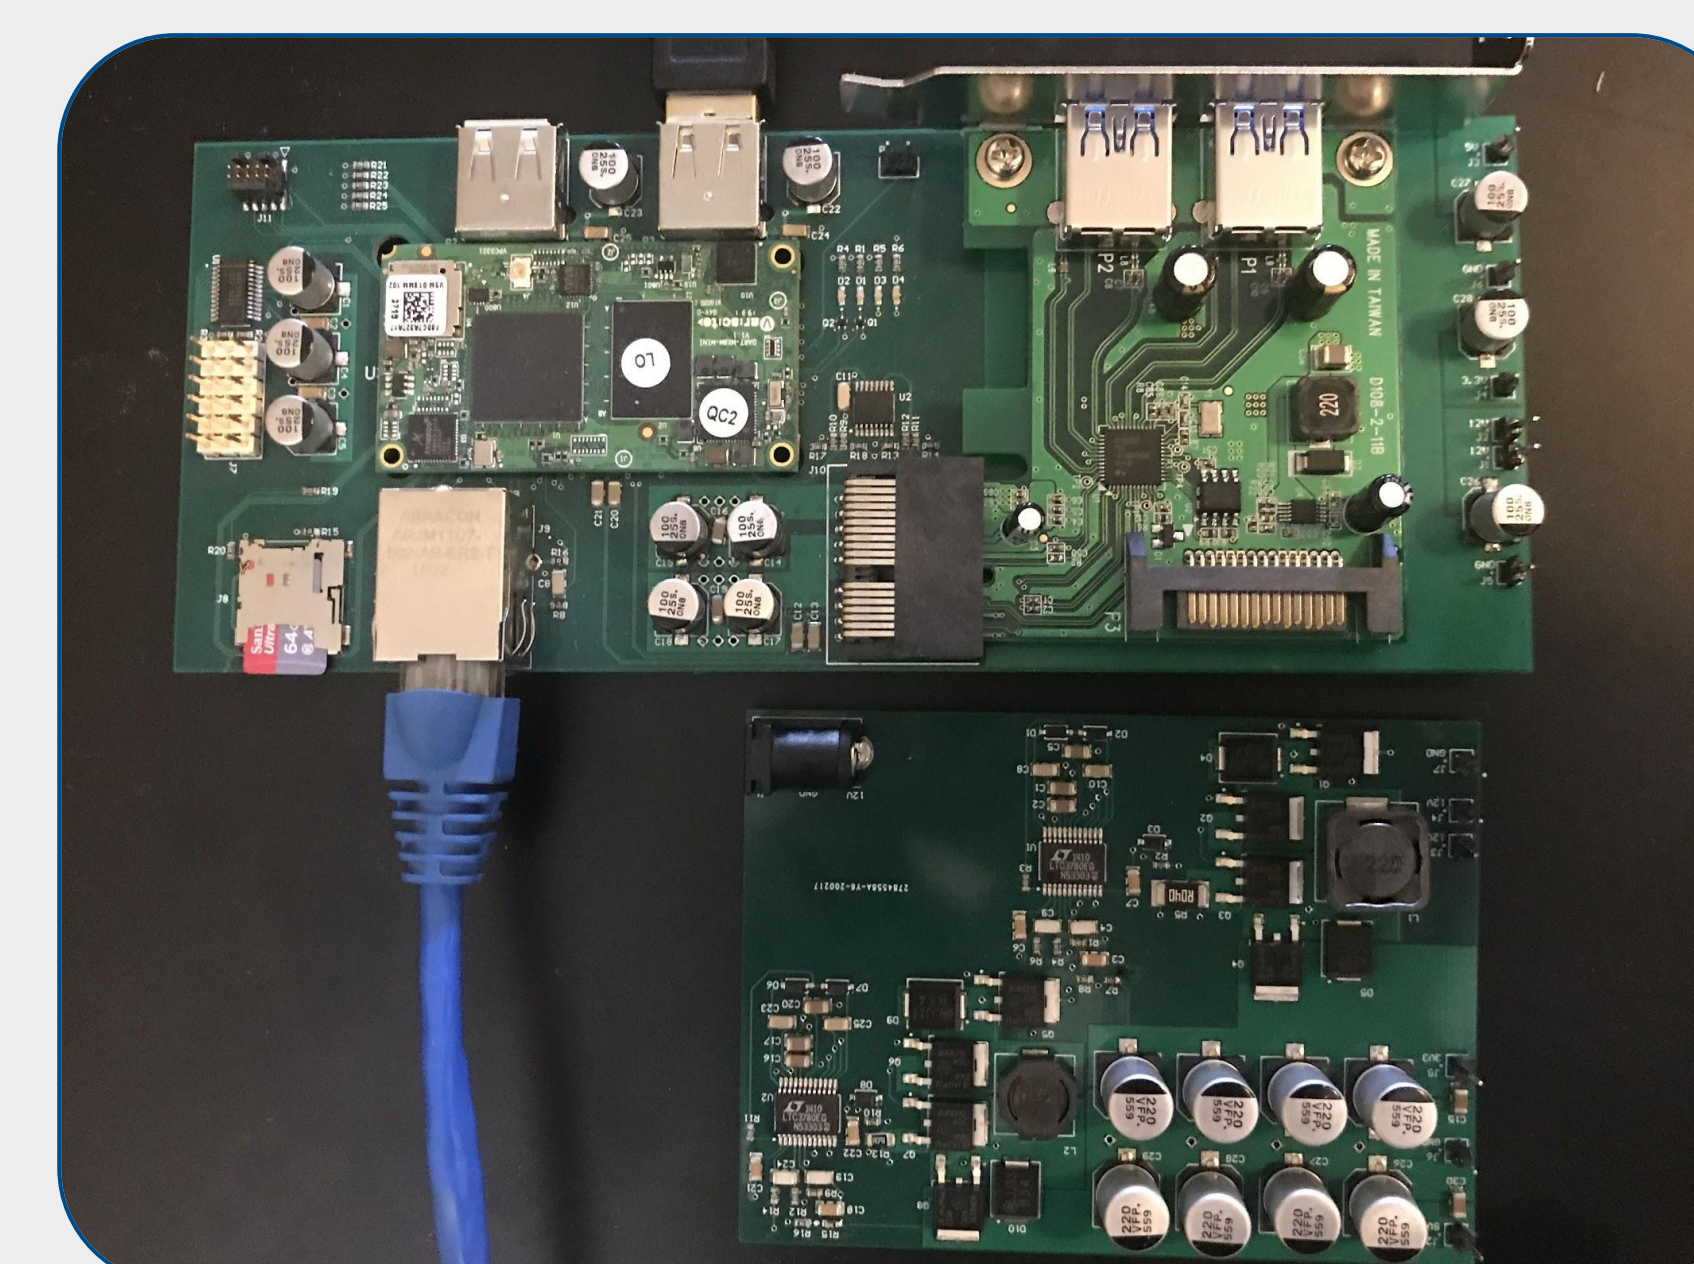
Custom hardware. Top: main PCB. Bottom: power PCB.
